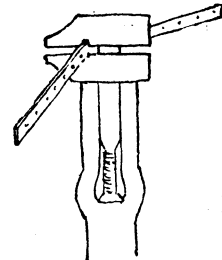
Screw wrench with $\frac{1}{8}$ in. by $\frac{1}{8}$ in. slots cut in jaws, holding a strip of splinting.
